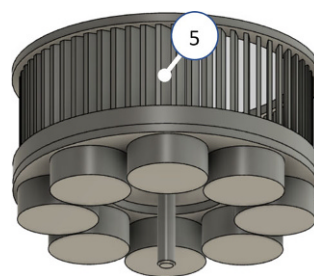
Illustration of Rotor 2 with fan blades (5)
